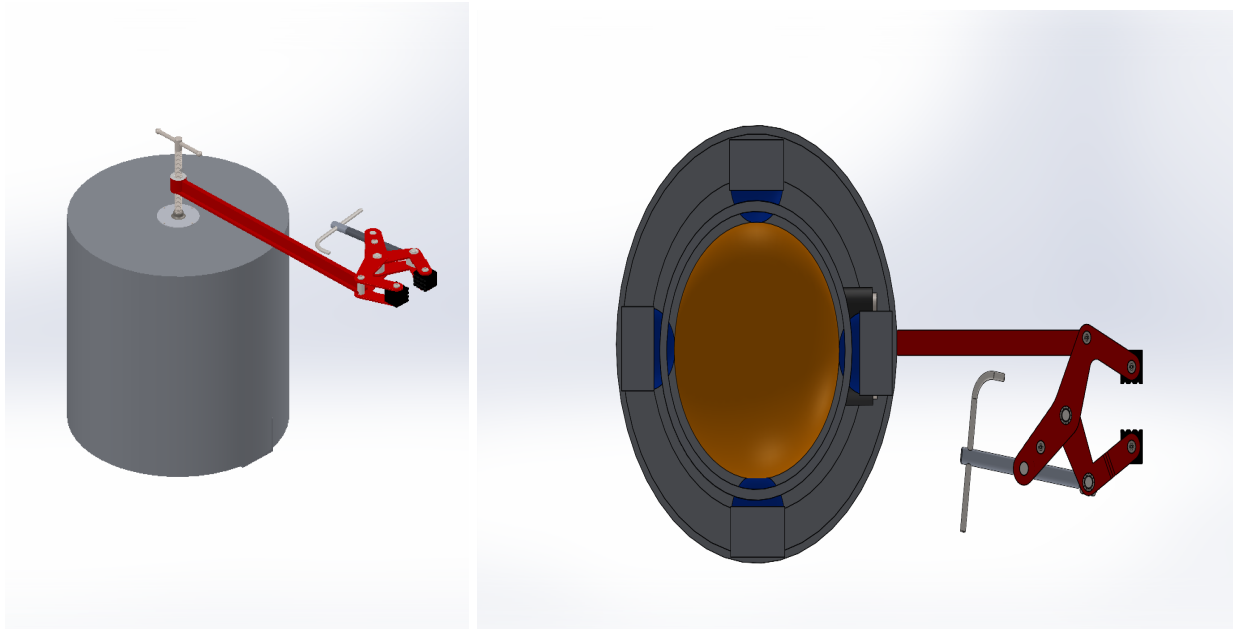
External mechanical design of attachment (isometric view, bottom view)[2][3][4]
